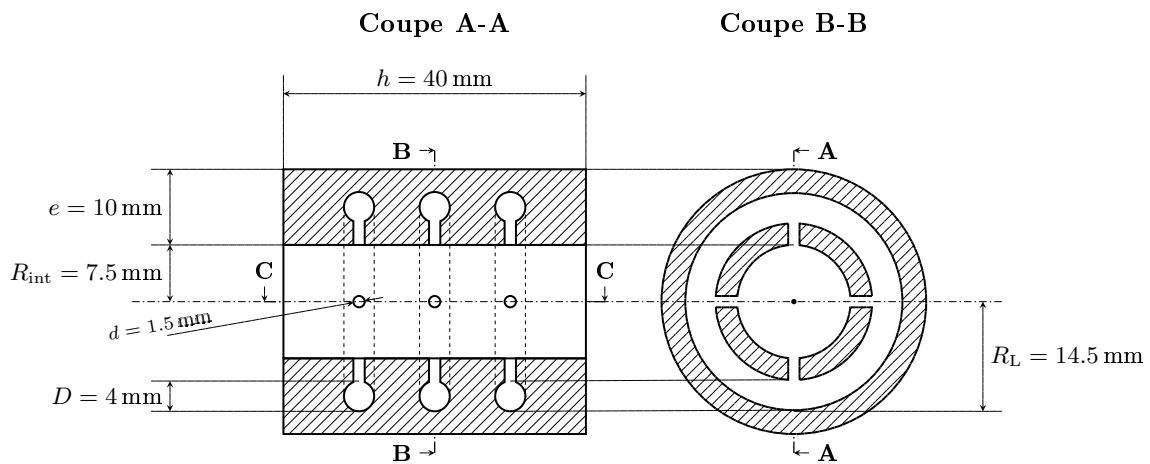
Drawing of the part to be produced, with dimensions of utilization
